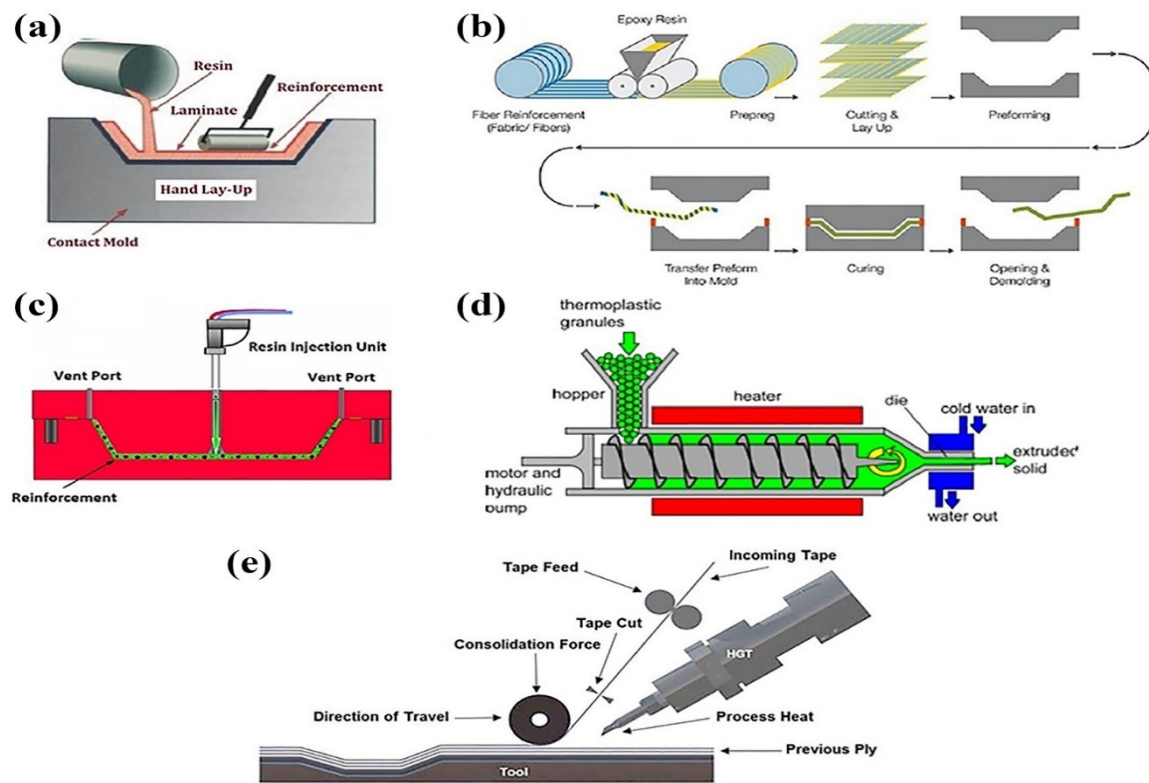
Schematics of various manufacturing techniques. (a) Hand layup process, (b) compression molding, (c) resin transfer moulding, (d) extrusion process, and (e) automated fiber placement [93].
